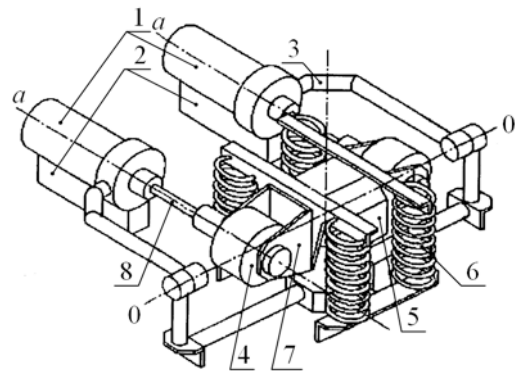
Schematics of two-rotor vibration unit: 1 – motors; 2 – motor supports; 3 – frame of the unit; 4 – unbalanced rotors; 5 – vibrating platform; 6 – carrying springs; 7 – rotor bearings; 8 – cardan shafts.
